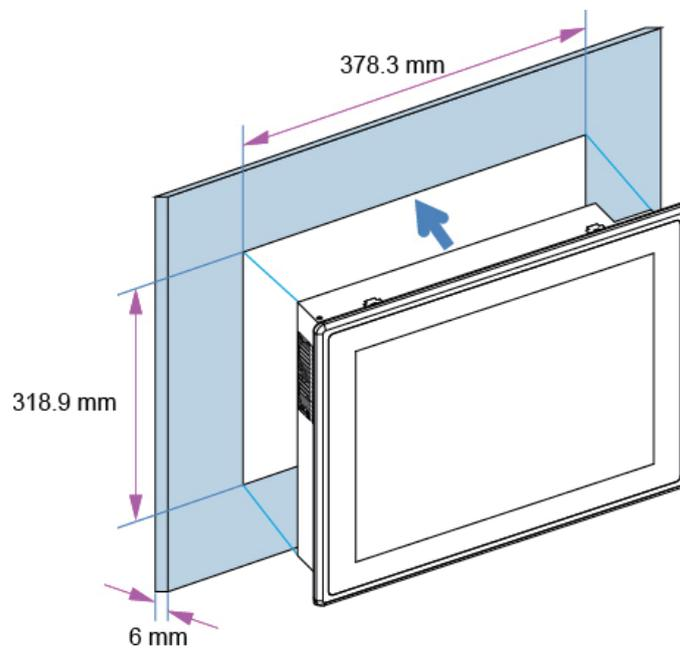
Panel Mount Cut-out hole and maximum panel thickness (MoniQ-1700)
